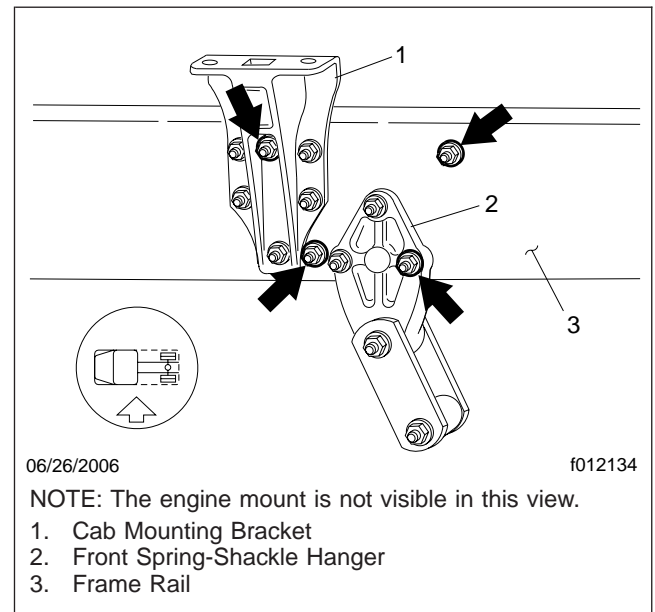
, Engine Mount-to-Frame Rail Fasteners
